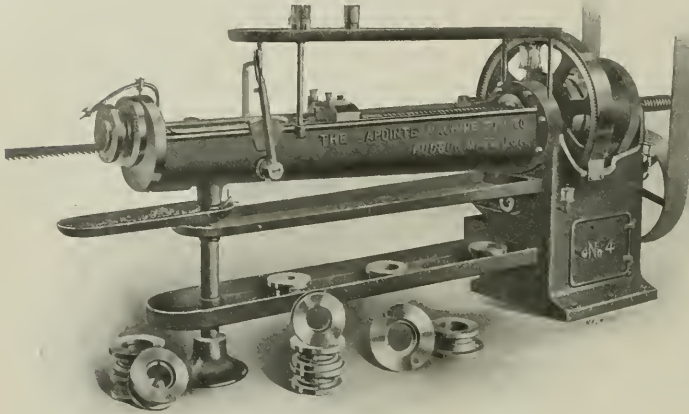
Heavy Broaching Machine, especially adapted to Automobile Work.
